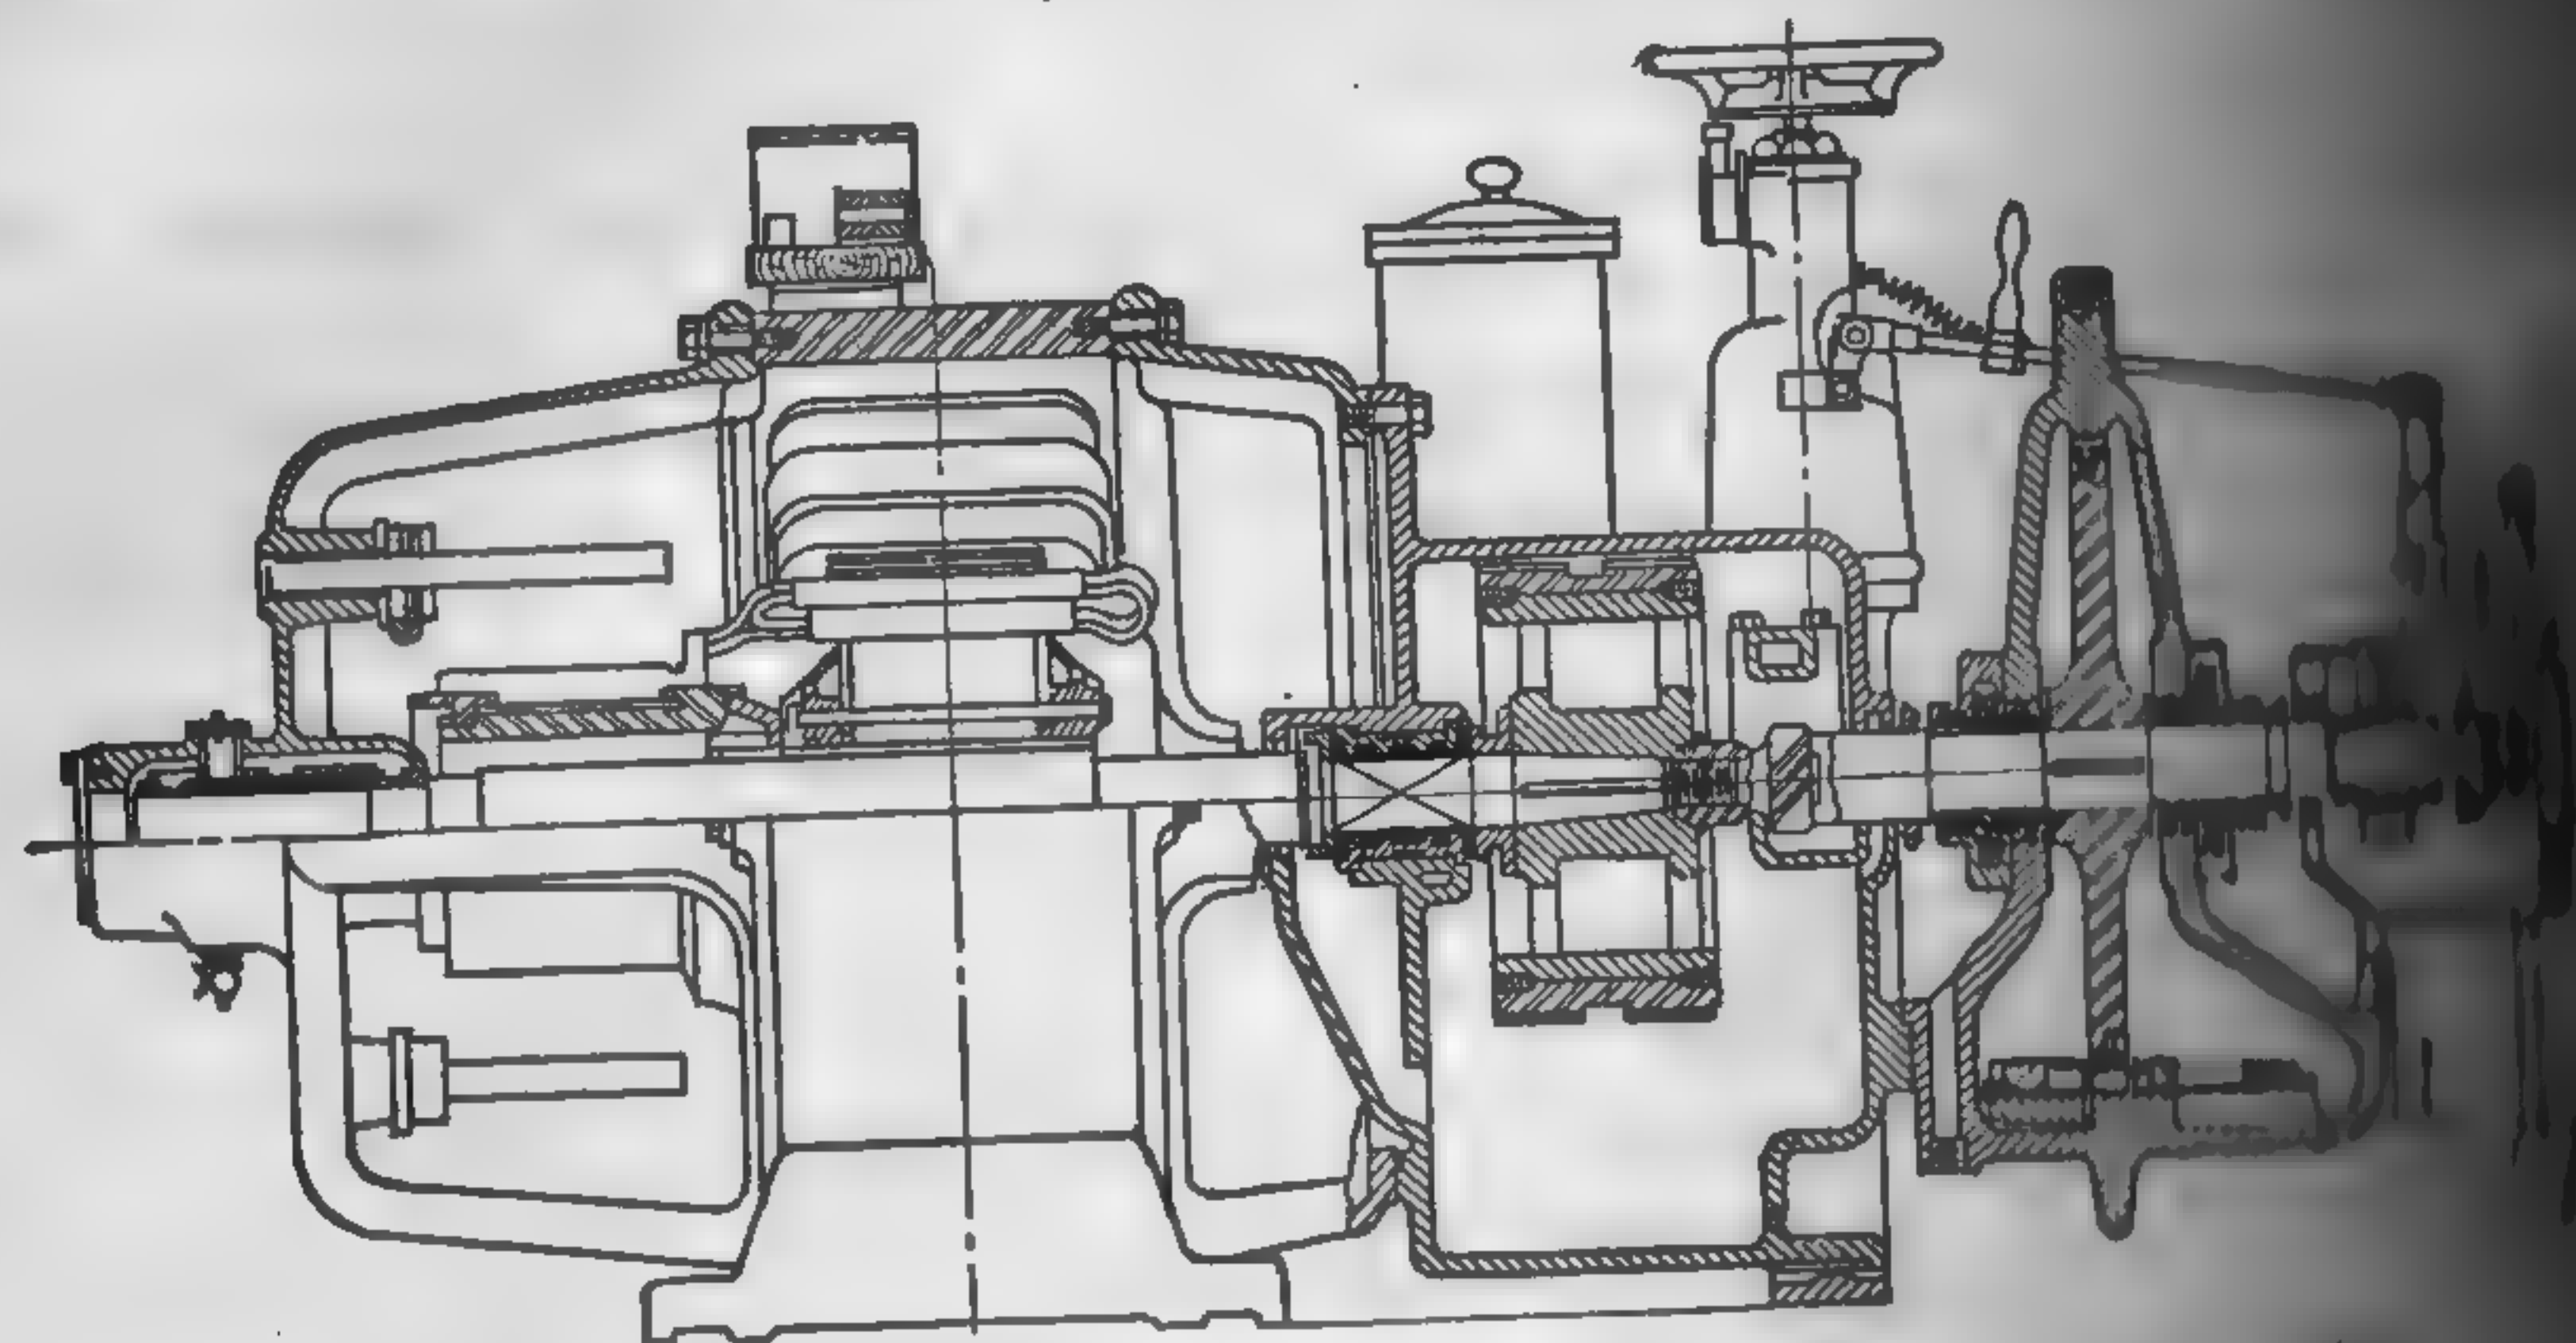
Westinghouse Impulse Turbo-Generator — Geared Set
